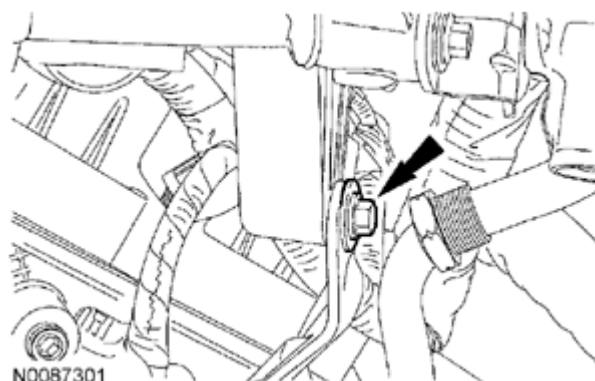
Locating Upper Intake Manifold Bracket Bolts
